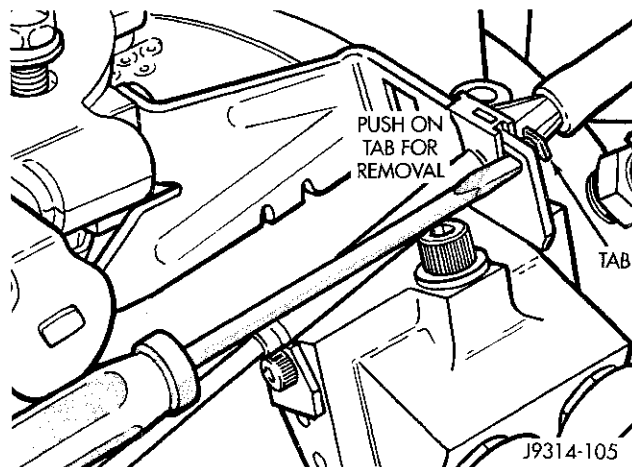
Cable Release Tab—3.9L/5.2L/5.9L Engines—Typical
